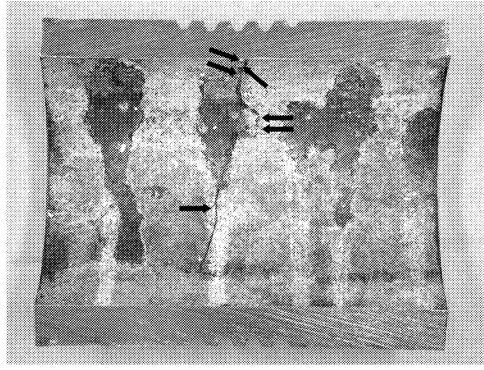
The crack on the inside crossed several pittings indicated by arrows. Fatigue crack development was followed in Figure 6-16.
